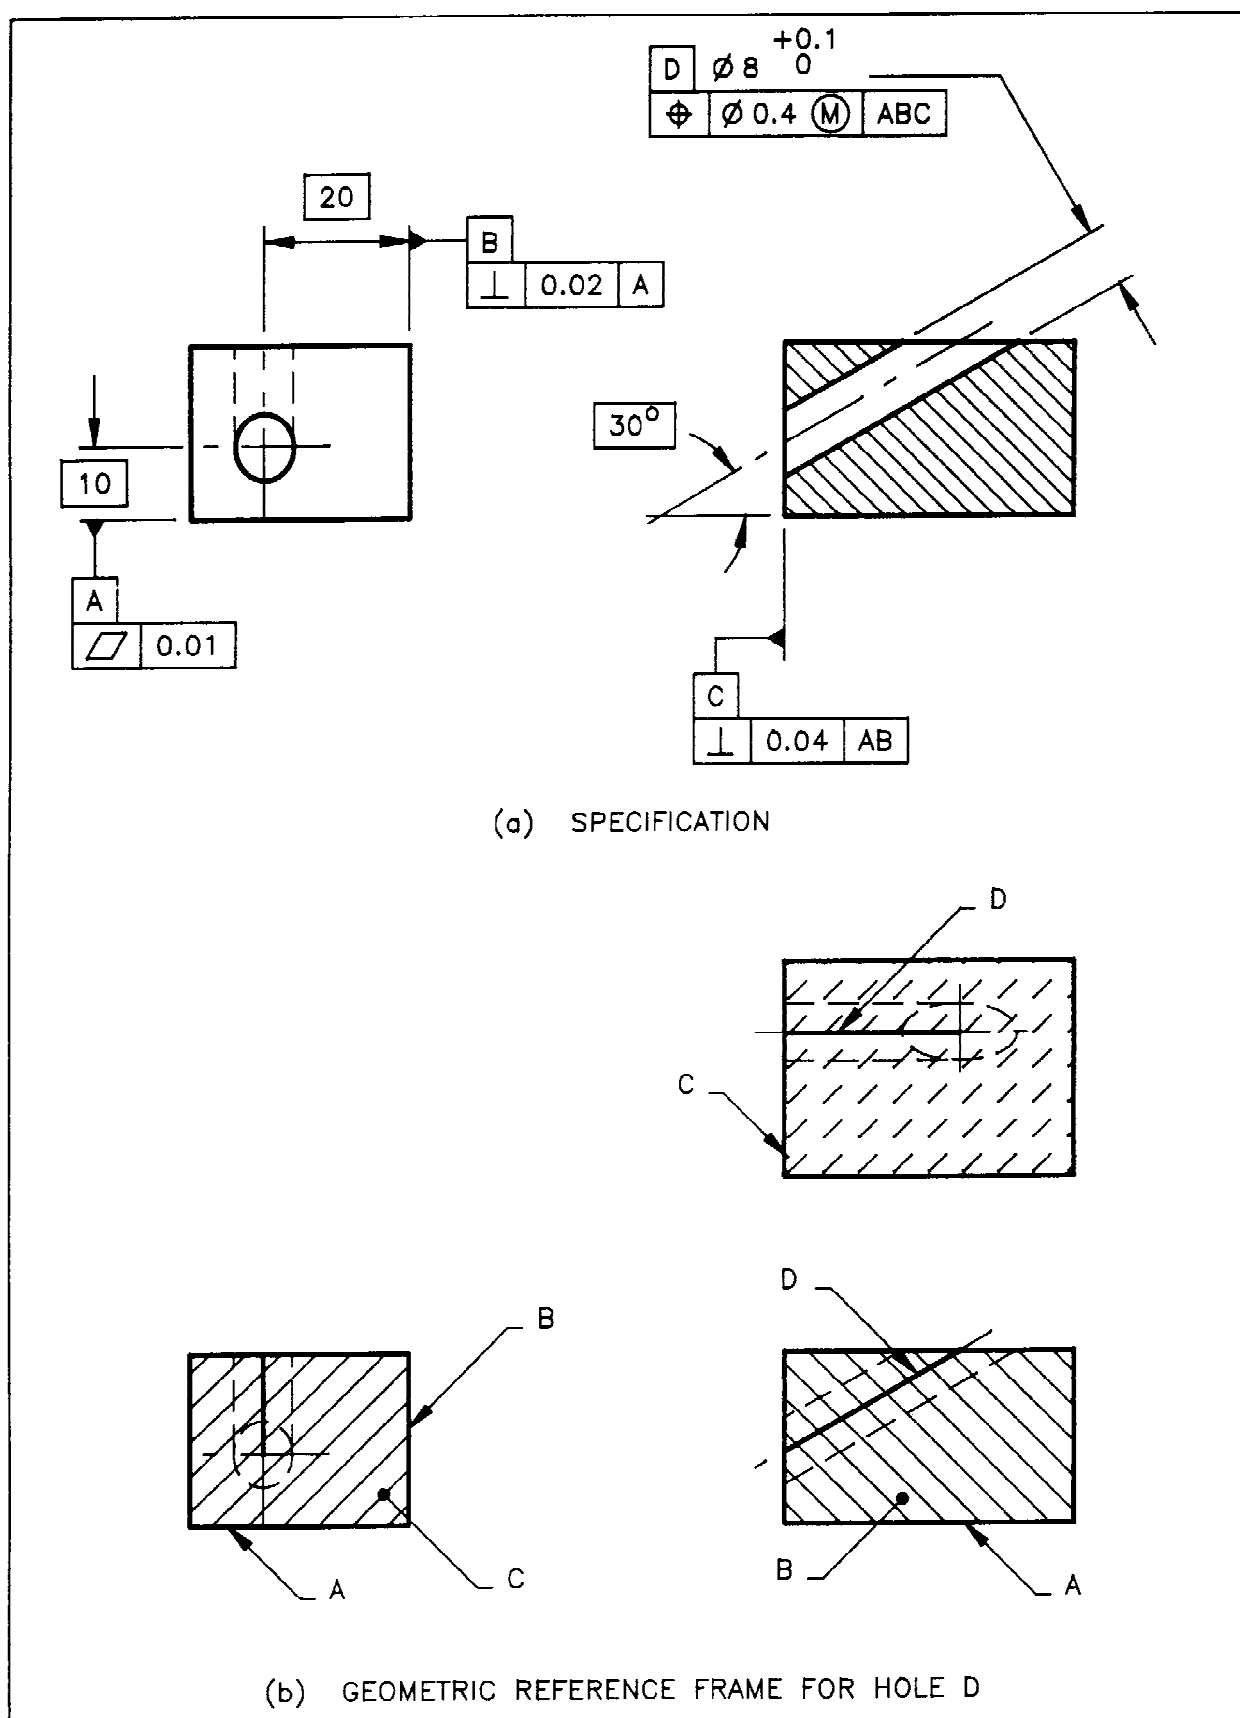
HOLE WITH 3 PLANE DATUM SYSTEM
